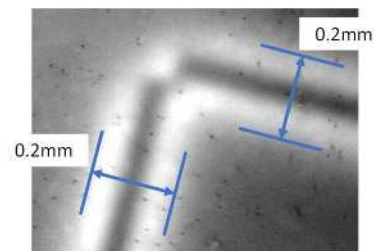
Image of internal hole observed using the electron beam induced acoustic microscope.
